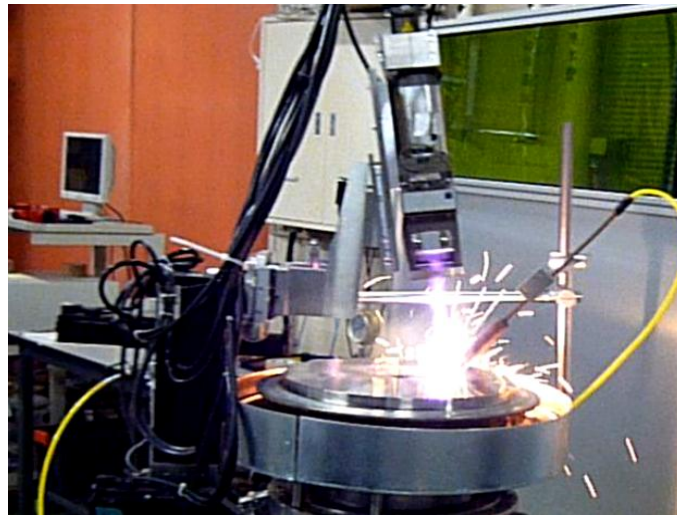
Weld trial with the orbital fiber laser system in Osaka University
